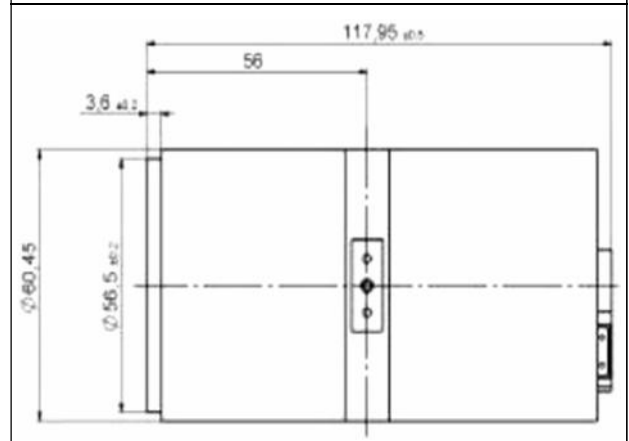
Flexure Bearing Compressor SF100A with 13 mm AIM Sleeve Coldfinger
